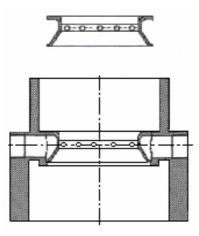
The Cross-Sectional Drawing Of The Mixer
